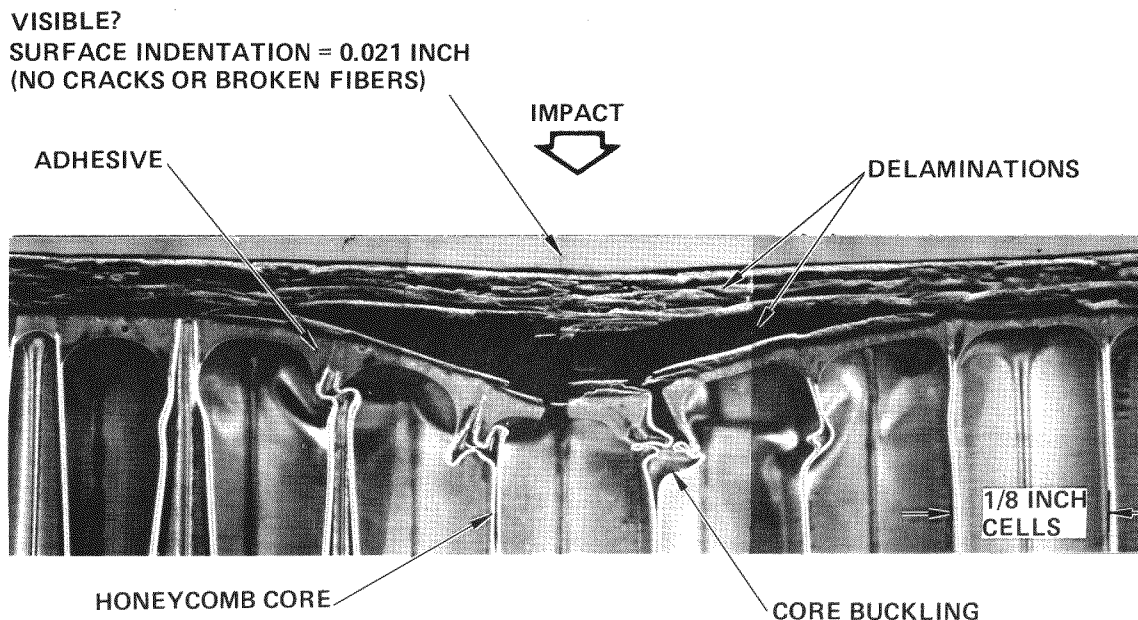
Typical Impact Damage in Sandwich Structure with Composite Face Sheets
